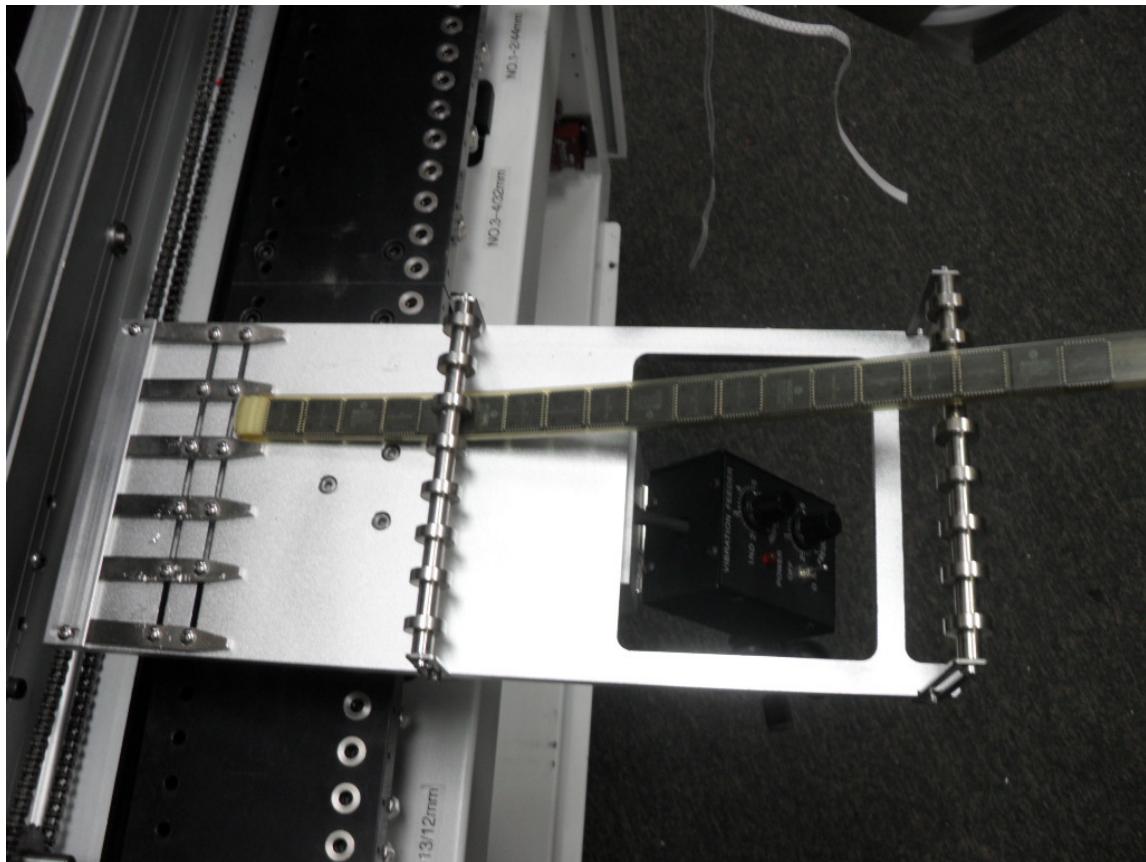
Vibratory Feeder component tube installed on the feeder platform
